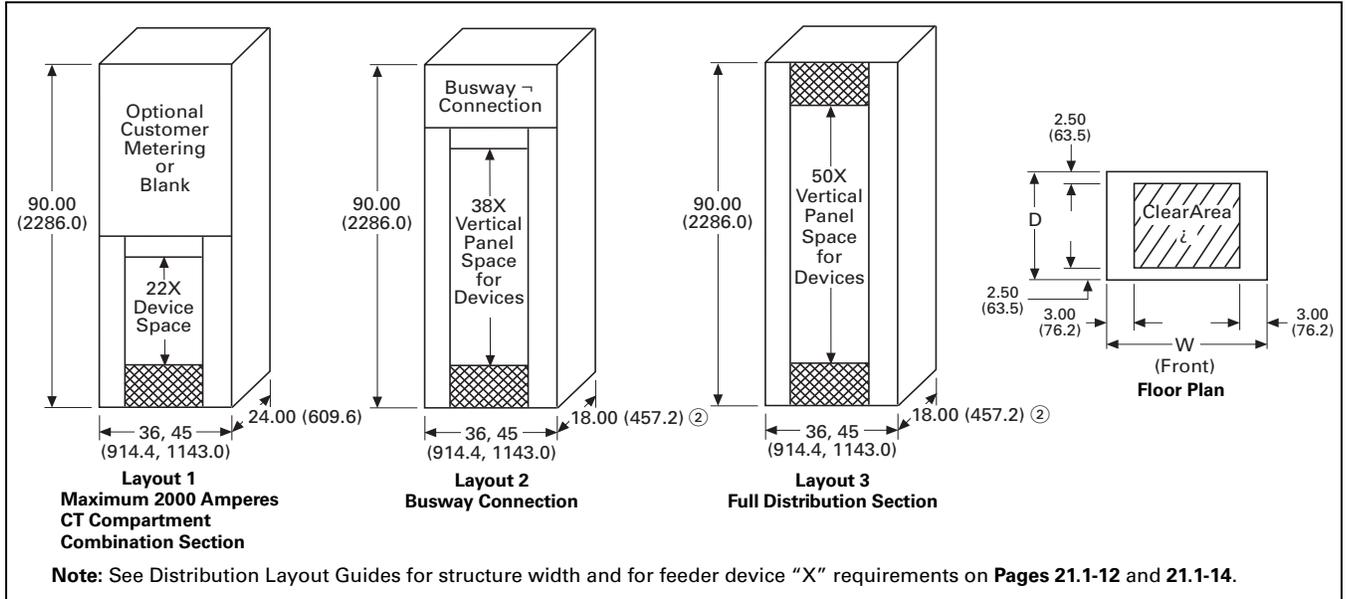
Distribution Section Layouts—Dimensions in Inches (mm)
